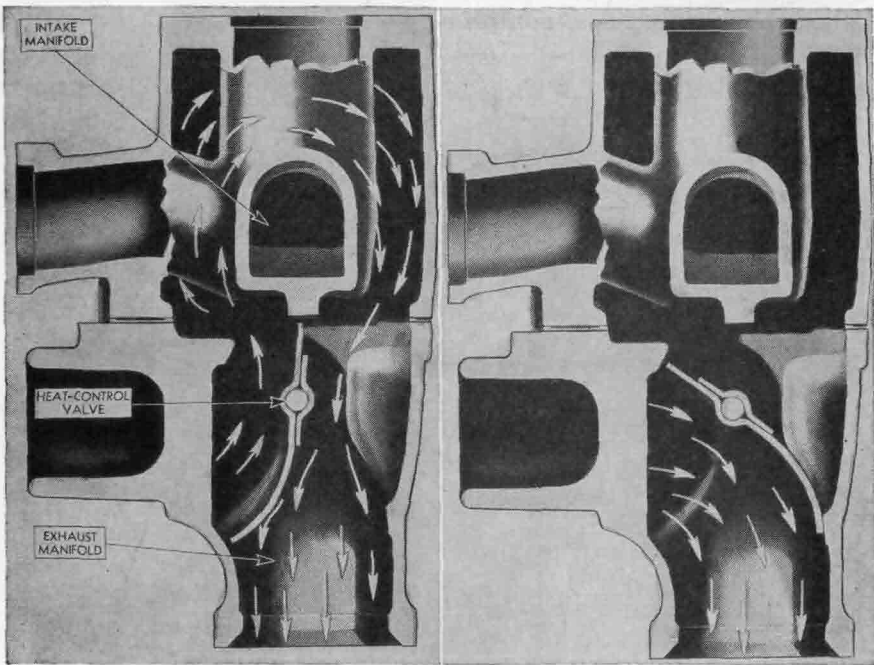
The two extreme positions in the exhaust manifold of the manifold heat-control valve that controls the flow of exhaust gases through the intake-manifold jacket. (Chevrolet Motor Division of General Motors Corporation)
